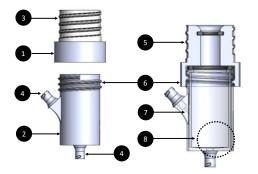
Computer-Aided Design (CAD) drawing of rinsing chamber: 1- upper part, 2- lower port, 3- external thread for fixation, 4- Luer Lock fittings, 5- port for Sonotrode, 6- GL 32 thread, 7- nozzle, 8- tissue holder.
